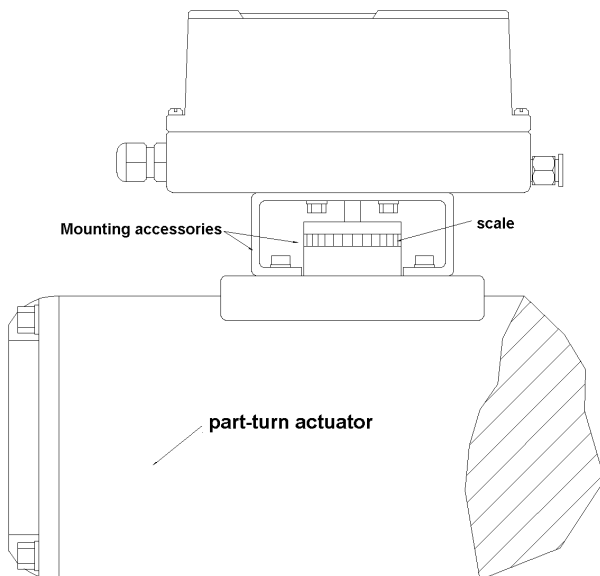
Mounting ET-SP2 On Part-turn Actuator
